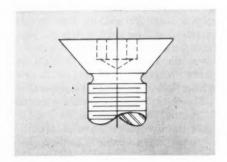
This illustration shows a method of necking the screw to eliminate the imperfect thread directly under the head.
